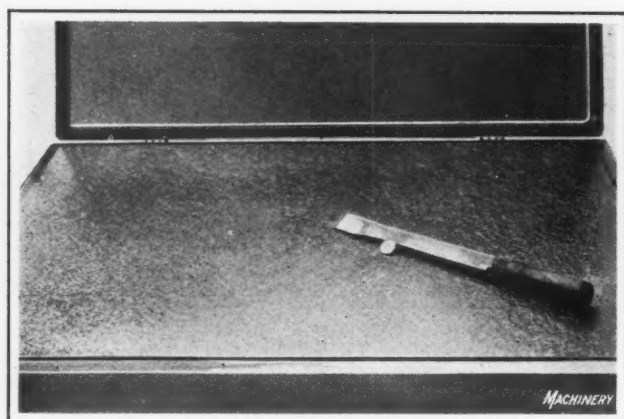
Master Surface Plate used to test Accuracy of Surface Plates used in the Shop
